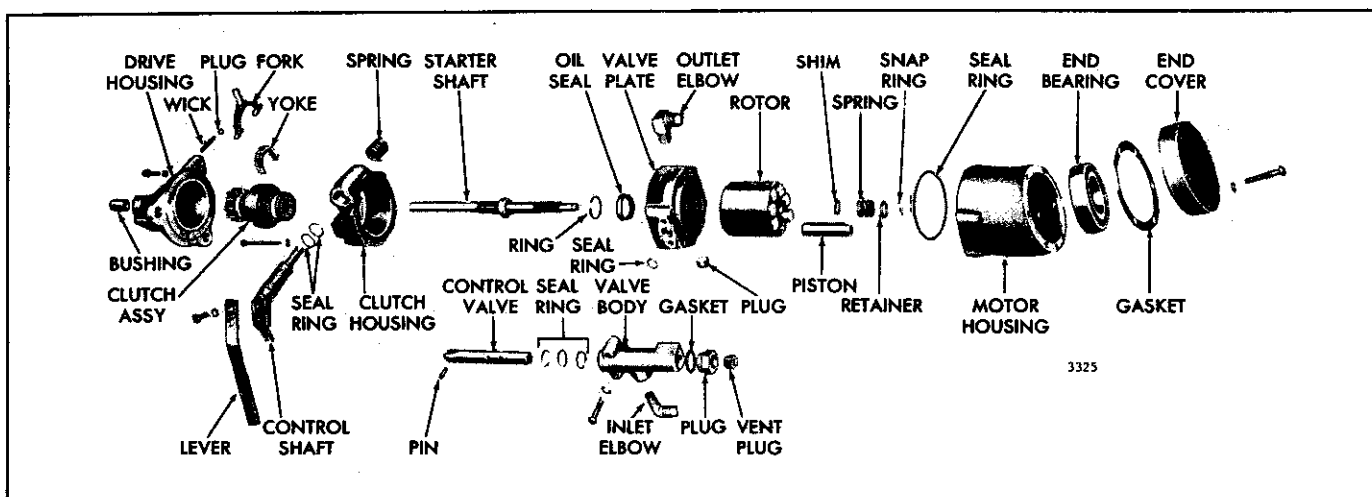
Hydrostarter Motor Details and Relative Location of Parts ("20" Series Motor Shown)
